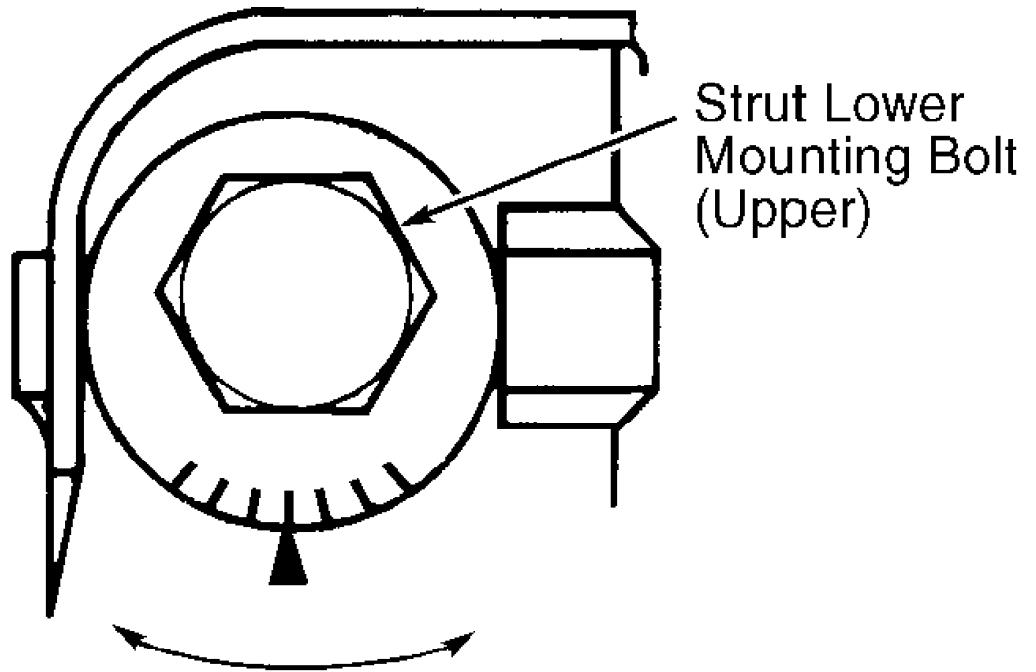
Adjusting Camber & Caster (Montero Sport Shown; Montero Is Similar)
